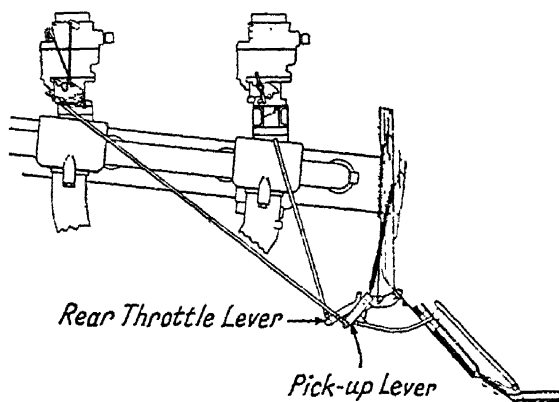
Throttle connections for Buick Compound Carburation System.
